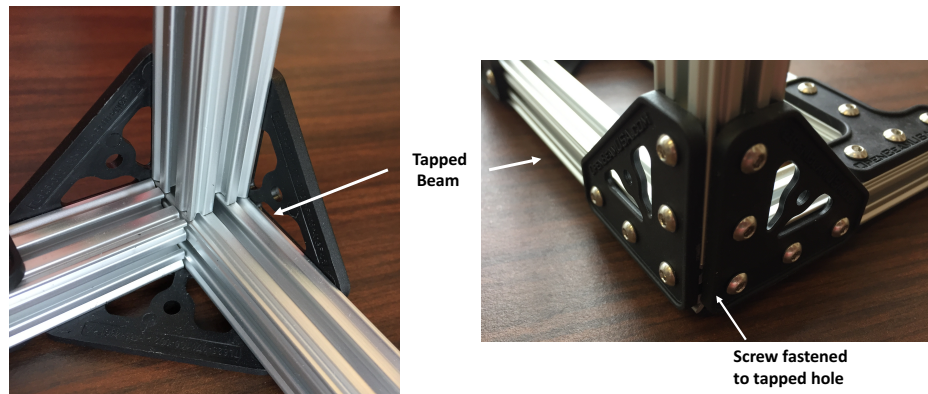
Fastening beams with corner brackets; Left: inside view, Right: outside view
